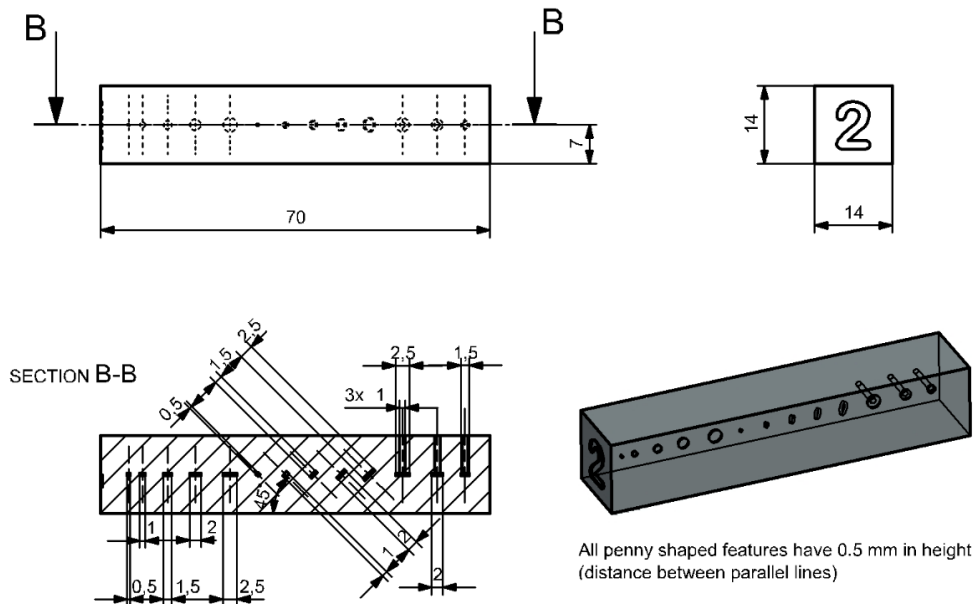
CAD drawing of IN 939 block 2 showing Penny defects without roof angle.
